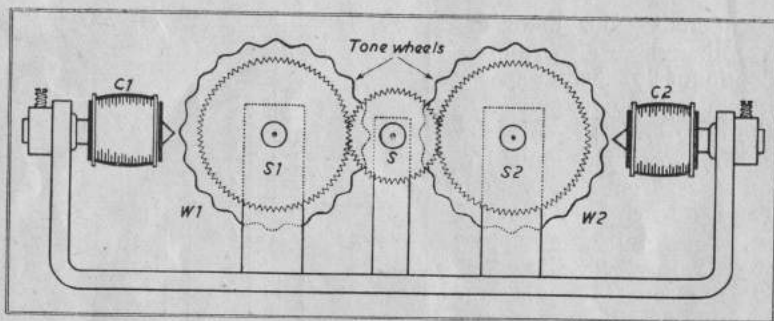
A section of the Hammond organ generator assembly, showing the gear drive, the tone wheels and the pick-up electromagnetics
